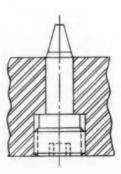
Core held by socket head set screw. An extra locking set screw is often added. This type is easily serviced.
